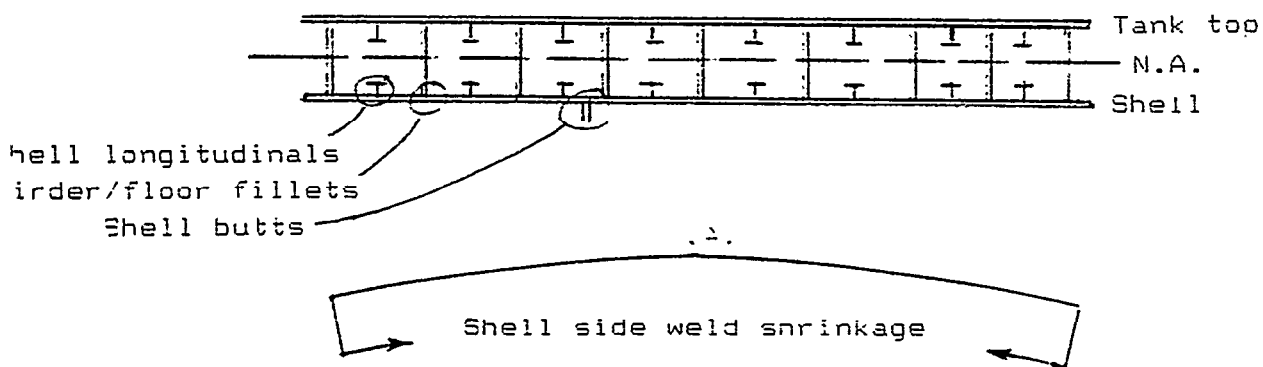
Innerbottom unit bending distortion from shell side welding
